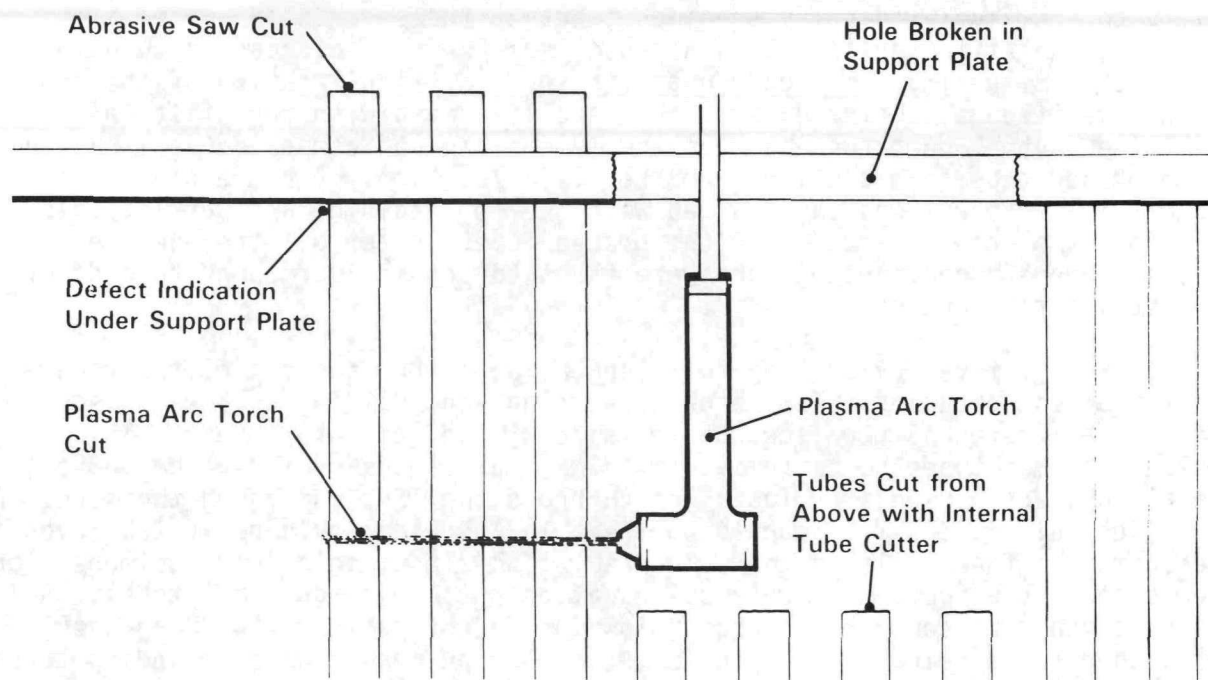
Technique for Removing Tube Specimens with Indicated Defect at Seventh TSP
